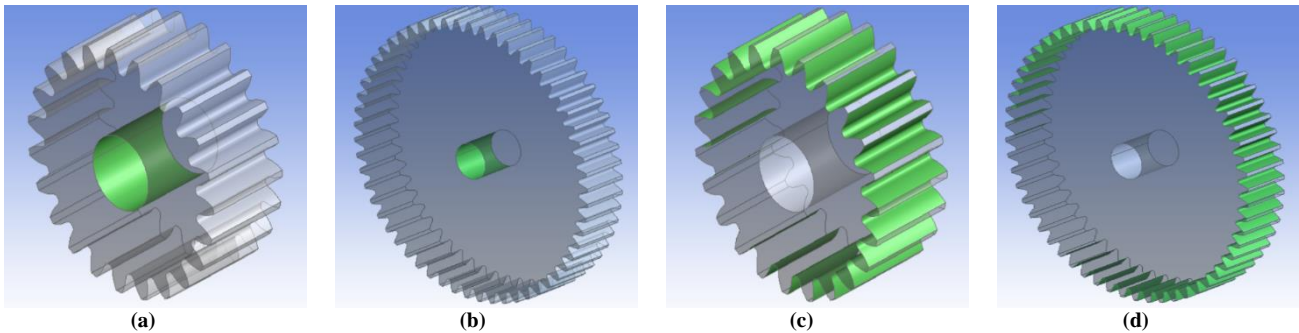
Scoping surfaces for the model: (a) PINION\_BORE, (b) GEAR\_BORE, (c) PINION\_FLANKS, (d) GEAR\_FLANKS.
